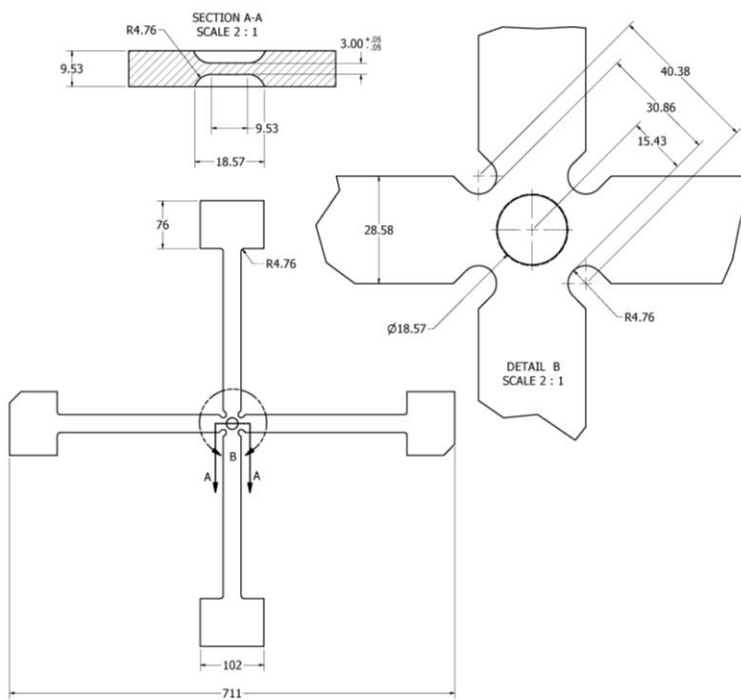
Cruciform geometry used for the thick specimen (dimensions in mm).
